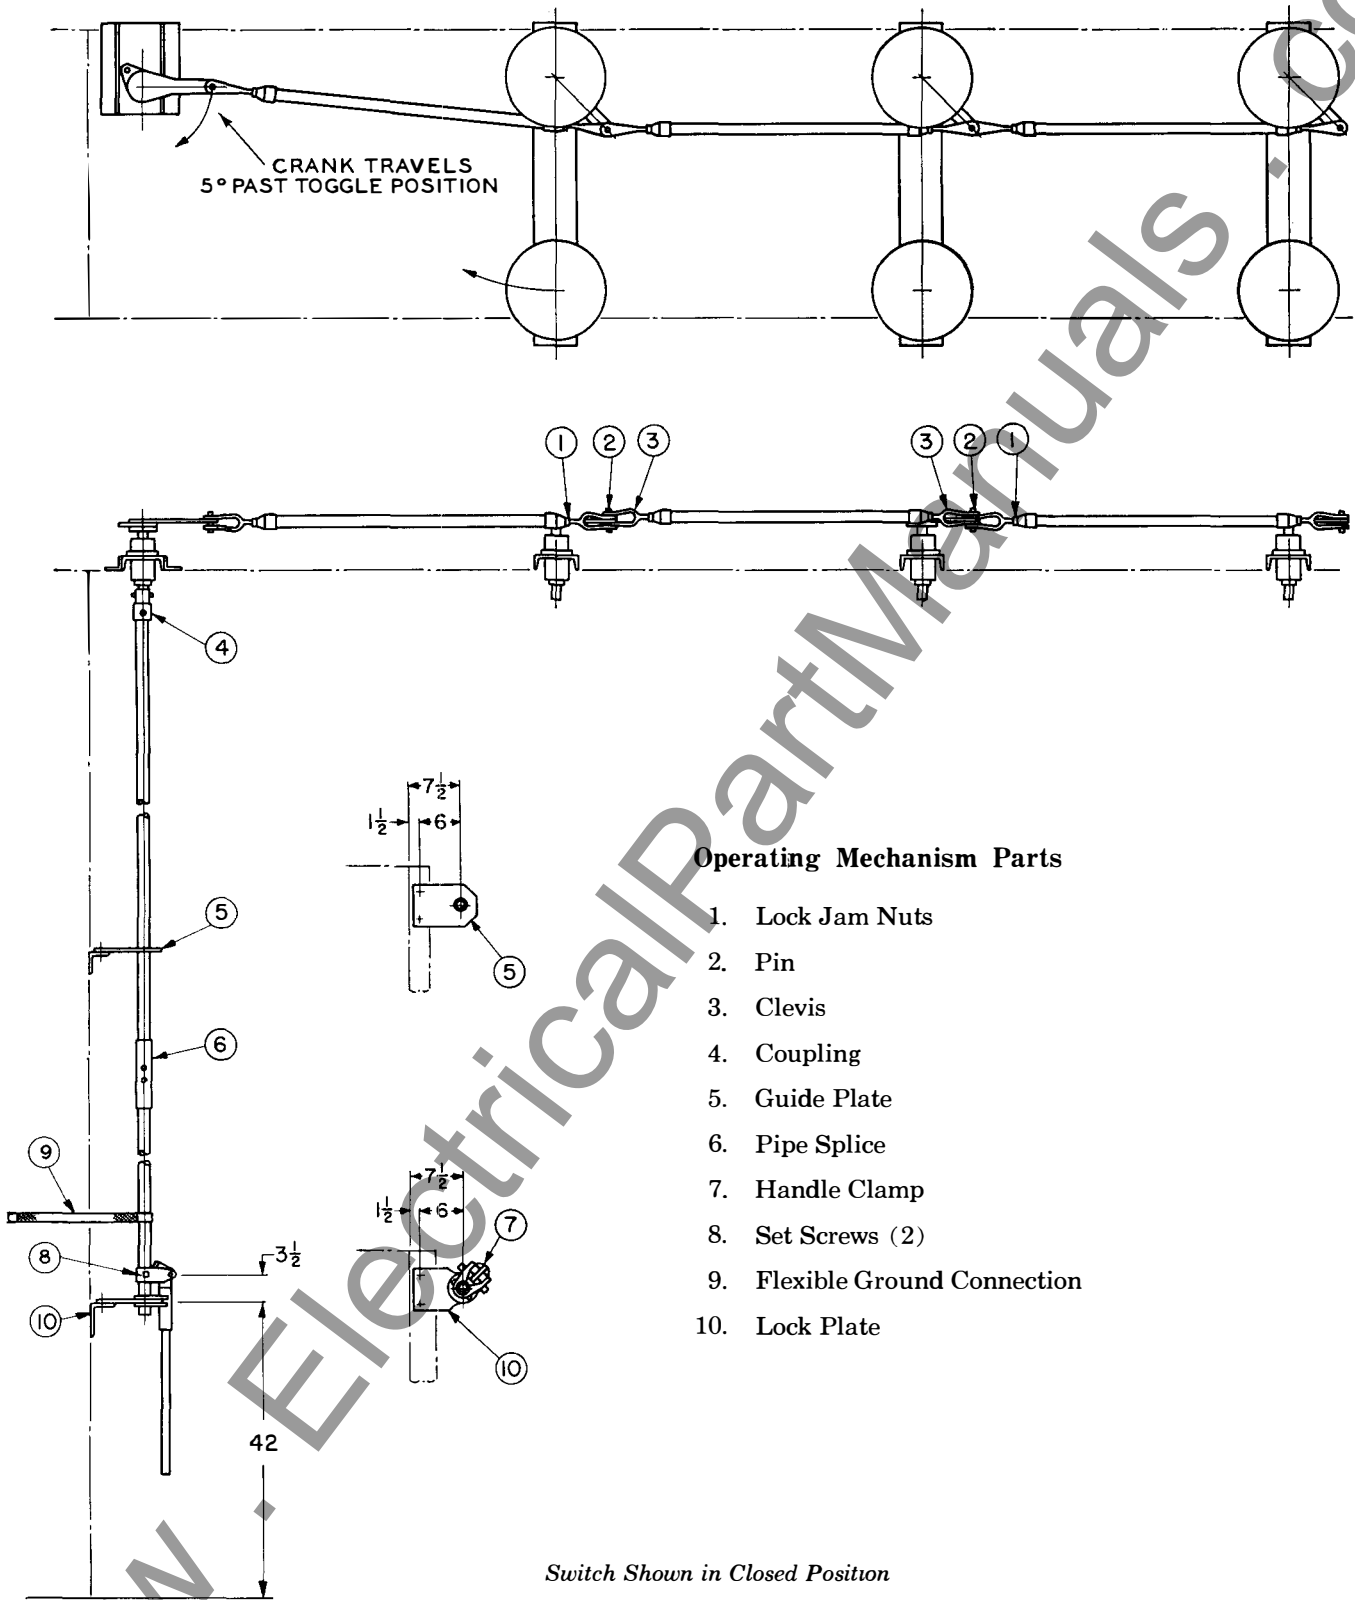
Shows a switch installation mounted on a steel structure. Again notice the crank arm on the "offset" base is toggled over center when the switch is closed. Can be used on all standard voltage ratings.
